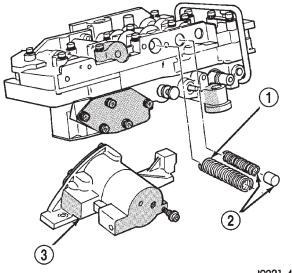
3-4 Shift And Converter Clutch Valve Springs And Plug
